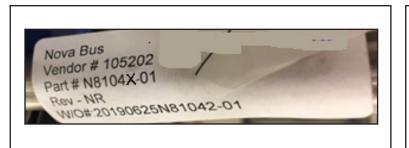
Example of Label - DO NOT REPLACE PIPE
